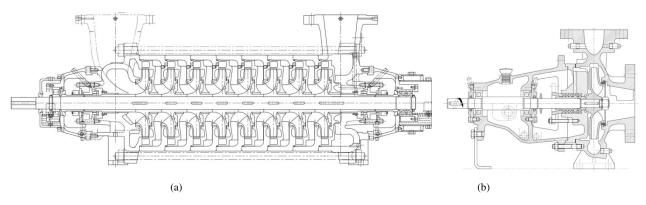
Cross sectional drawing of (a) multistage pump (b) end suction pump
